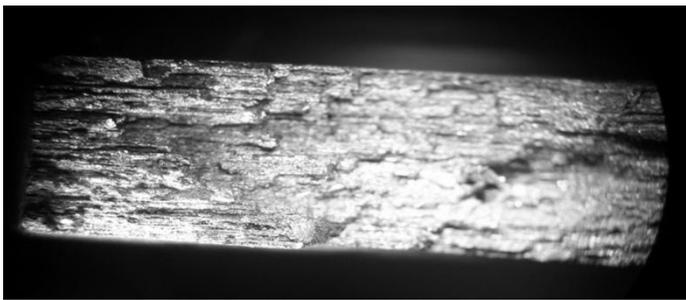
Photograph of tensile specimen failure surface showing the laminar structure of wrought iron
